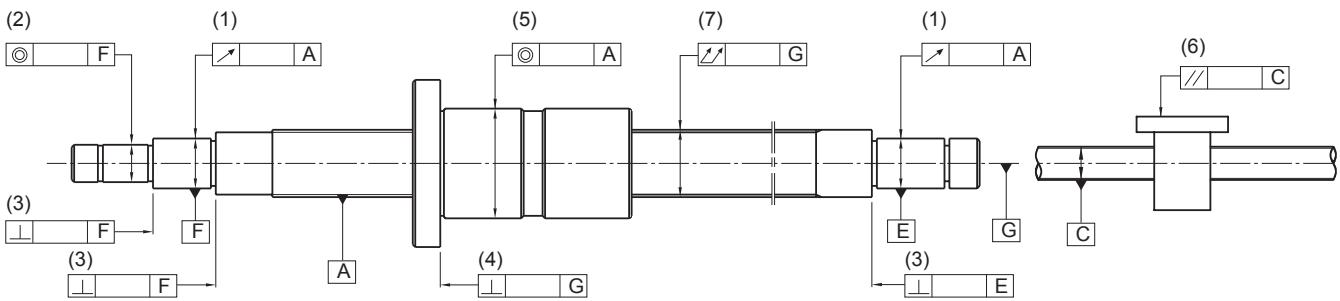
Mounting Accuracy and Tolerance
